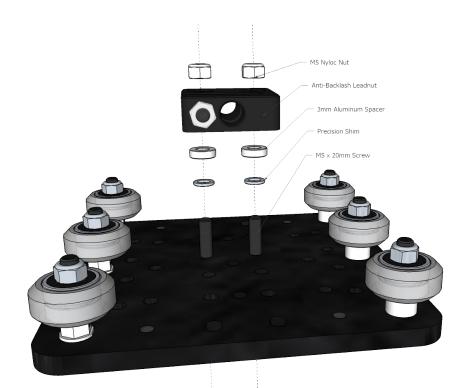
Assemble Z Axis Gantry Plate: Install Anti-Backlash Lead Nut: Exploded View
